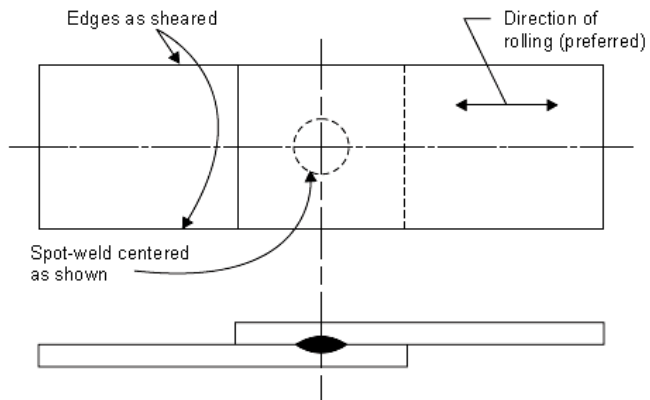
Test specimens for tension shear of Resistance Welding
